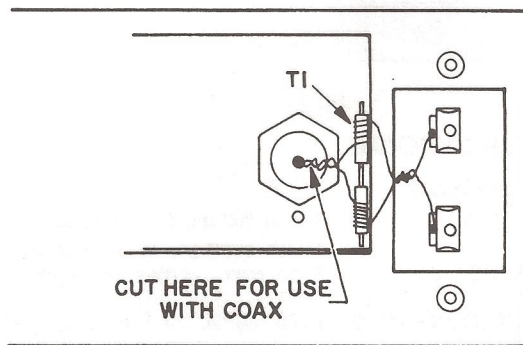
Preparation of Model UPC for use with 75Ω coax input. Internal view of chassis.
